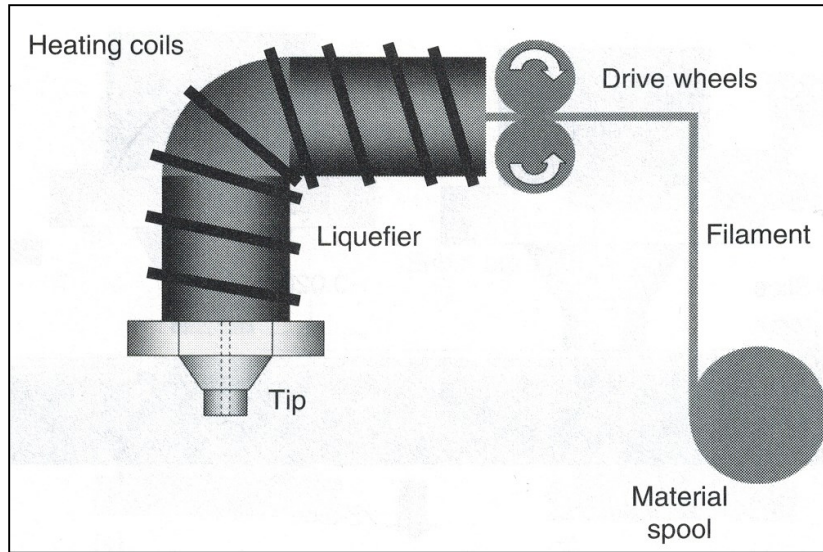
The fusion deposition modeling (FDM) process. A thermoplastic filament is extruded through a hot end so that molten plastic is deposited on a platform to form layers.²
